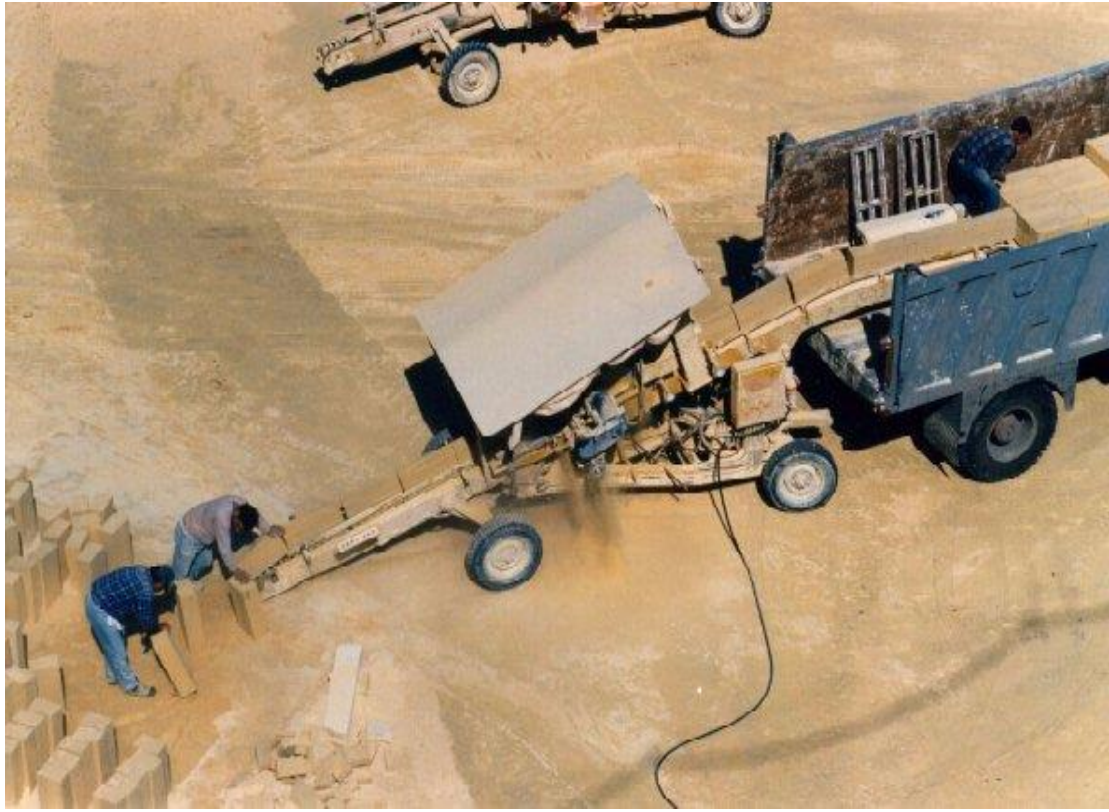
Workmen using a stone dressing machine prior to loading softstone on a truck.
